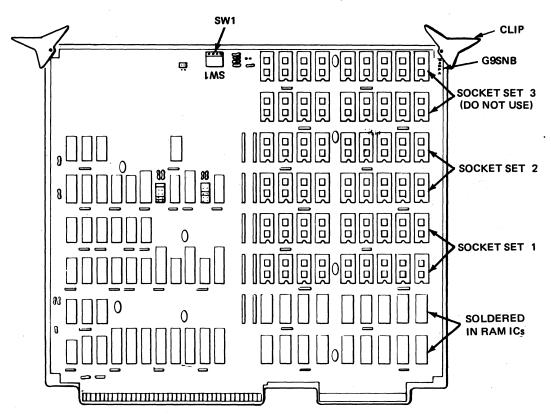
The APC-H31 Memory Expansion Unit PCB (G9SNB)
